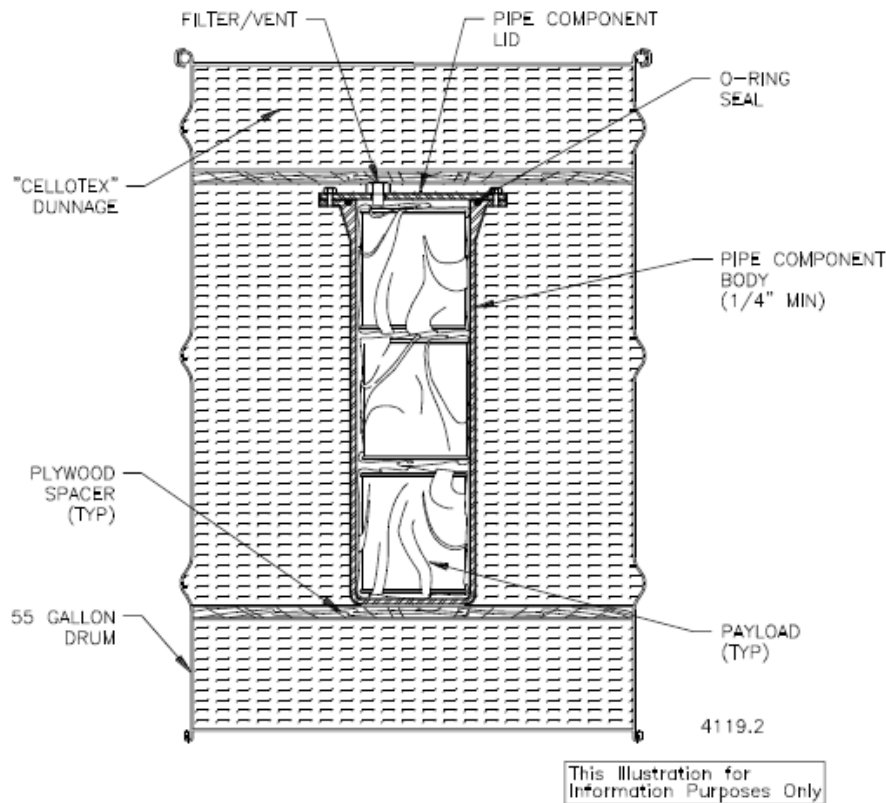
Figure D-, Standard 6-inch Pipe Component in Overpack Assembly
